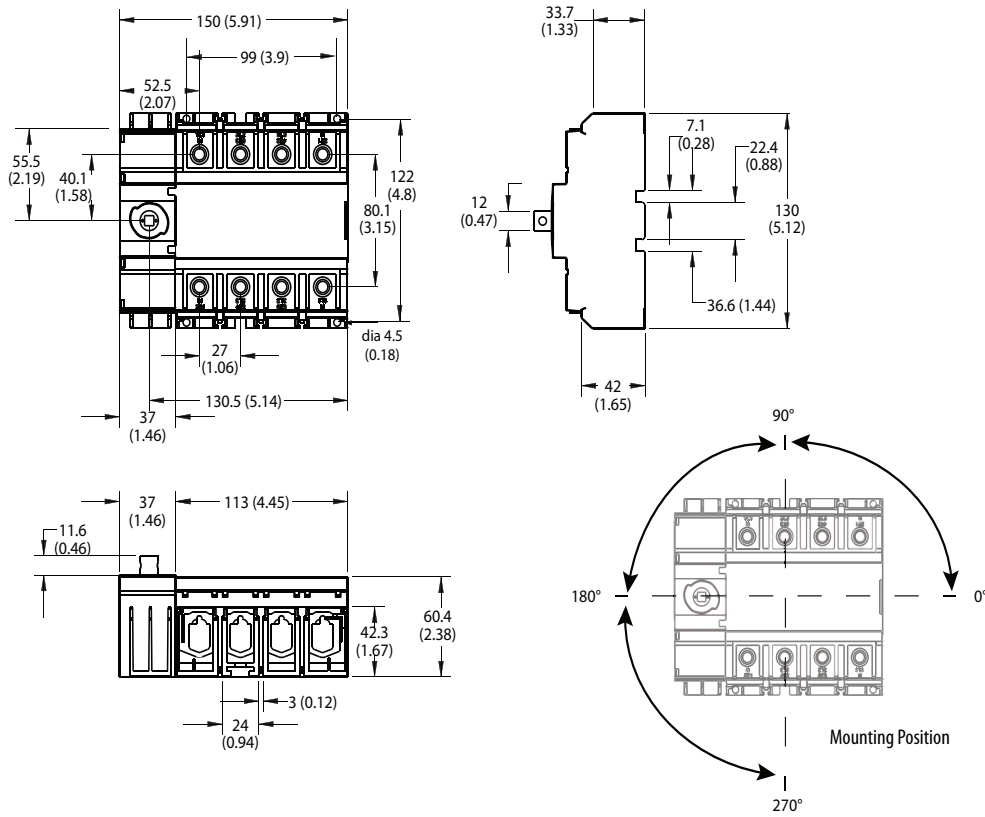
160 A Door-mounted Switches, 3-pole Devices
